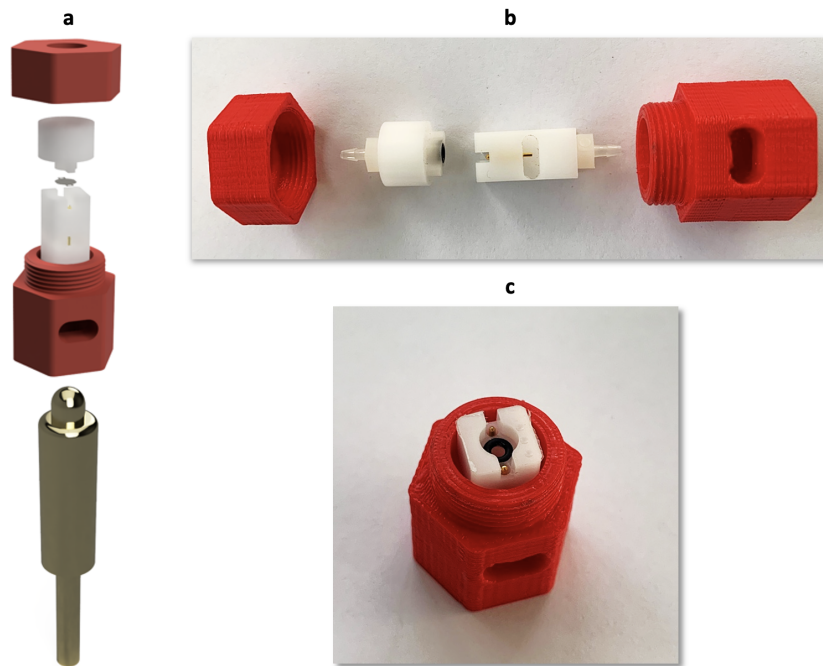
(a) Scattered 3D model of the holder machined in POMc (white parts), 3D printed (red parts) and the spring-loaded pogo pin used for electrical contact in between the microfabricated device and the impedance analyzer. (b) Scattered and top view (c) of the fabricated filter holder.
